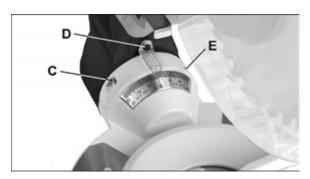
8.5.2 45° bevel stop adjustment
